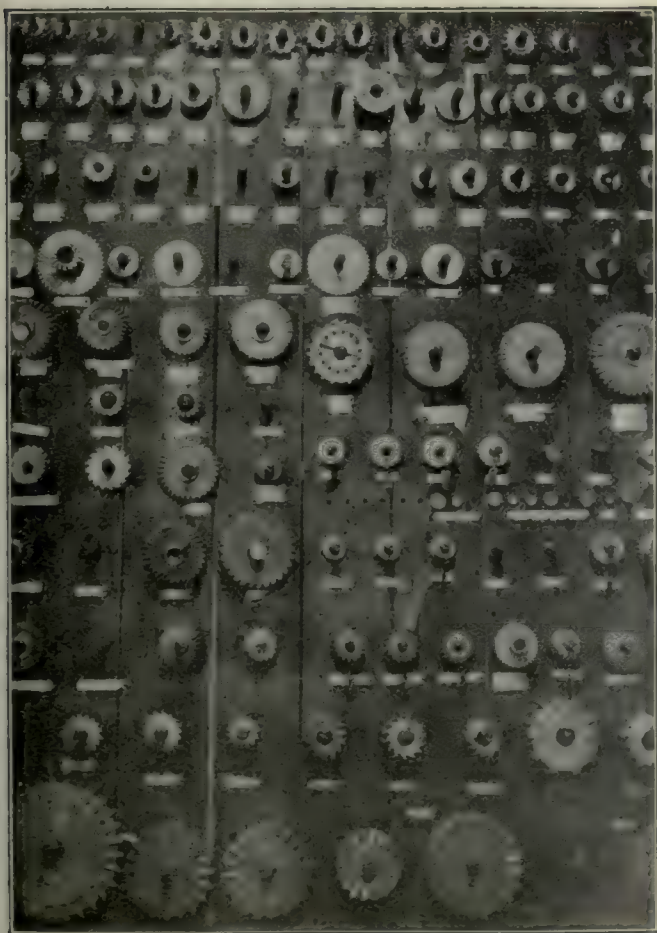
TYPE OF STORAGE BOARDS PROVIDED FOR MILLING CUTTERS
